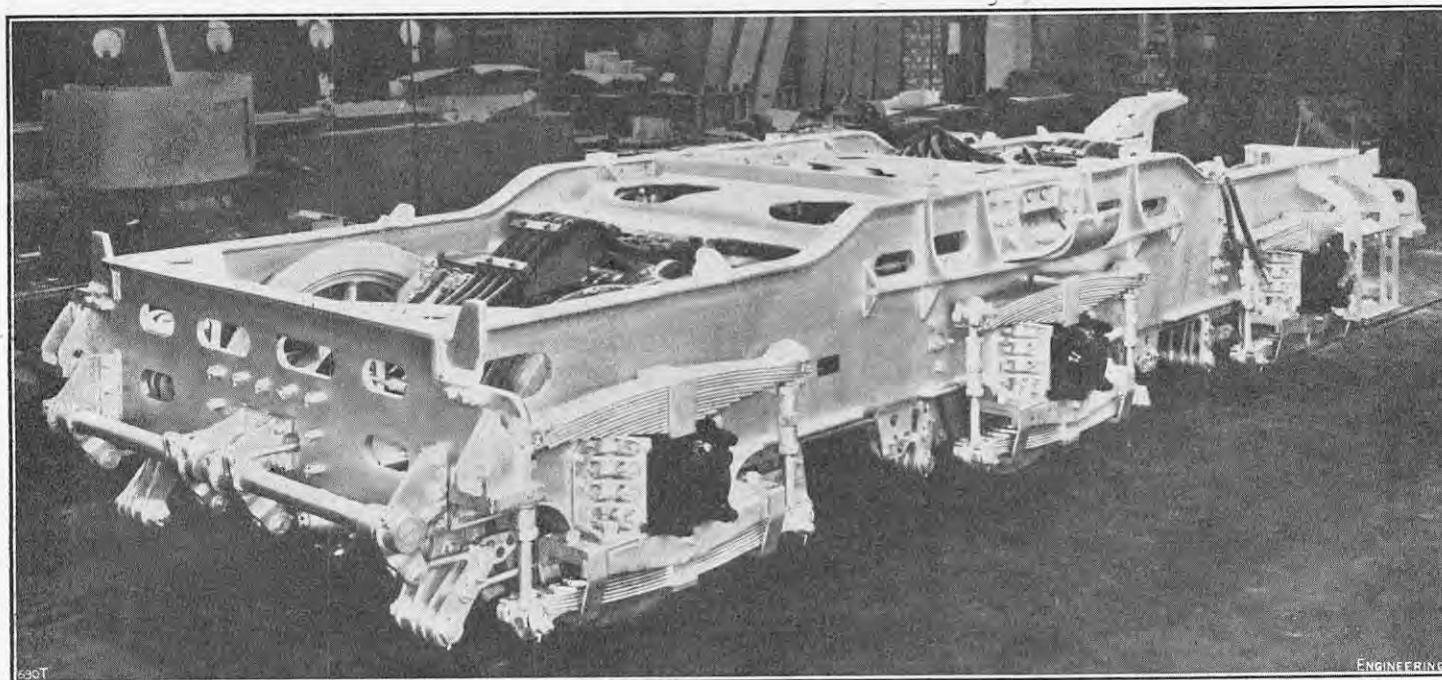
SIX-WHEELED LOCOMOTIVE BOGIE.
